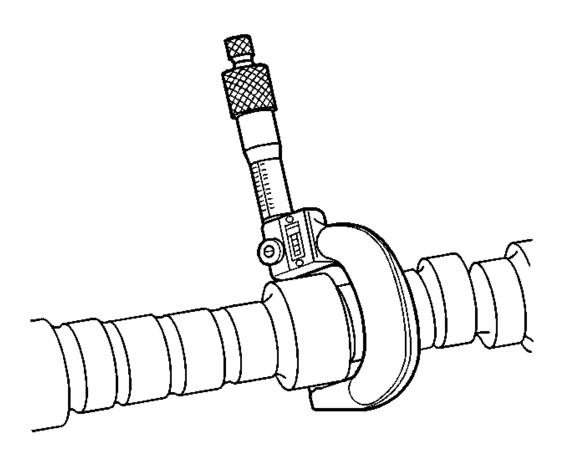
Measure Camshaft Journals With Micrometer Courtesy of GENERAL MOTORS CORP.
